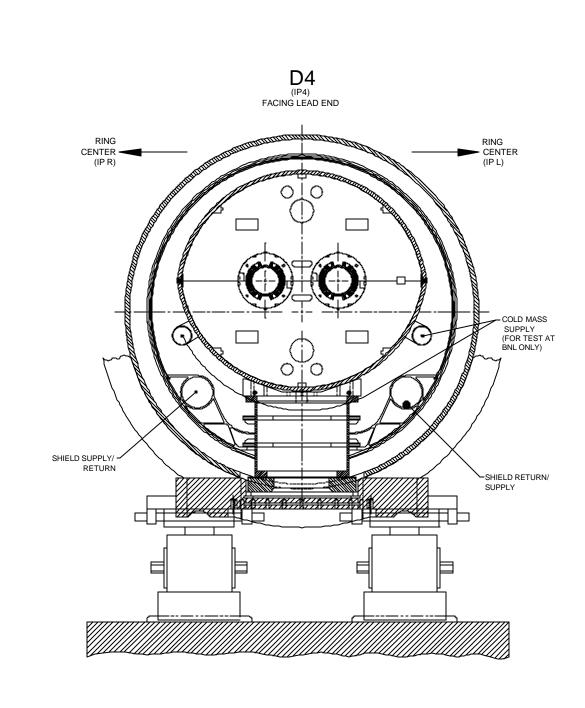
Sectional view of the LBRB (D4) cryo-assembly
